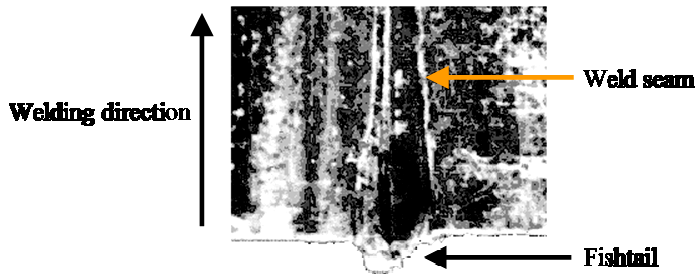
Microphotograph of a fishtail at the end of the can body after welding. The fishtail being the result of material longitudinally extruded in relation to the welding direction beyond the can body end.
